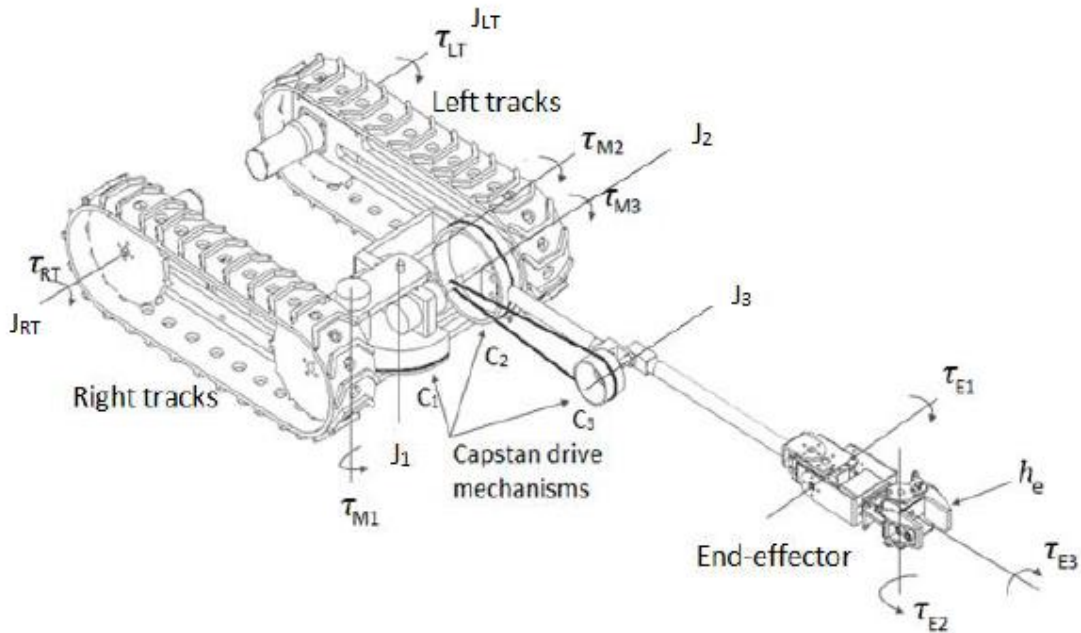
MM-UGV CAD drawing of joint axes and mechanisms
